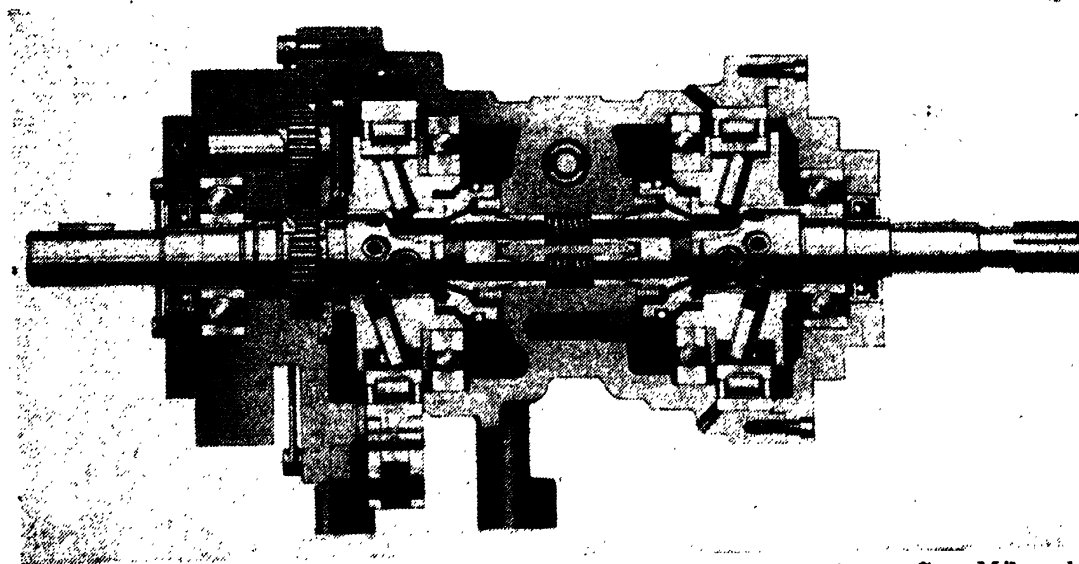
New design of Oilgear integral transmission. (The Oilgear Co., Milwaukee, Wis.)
